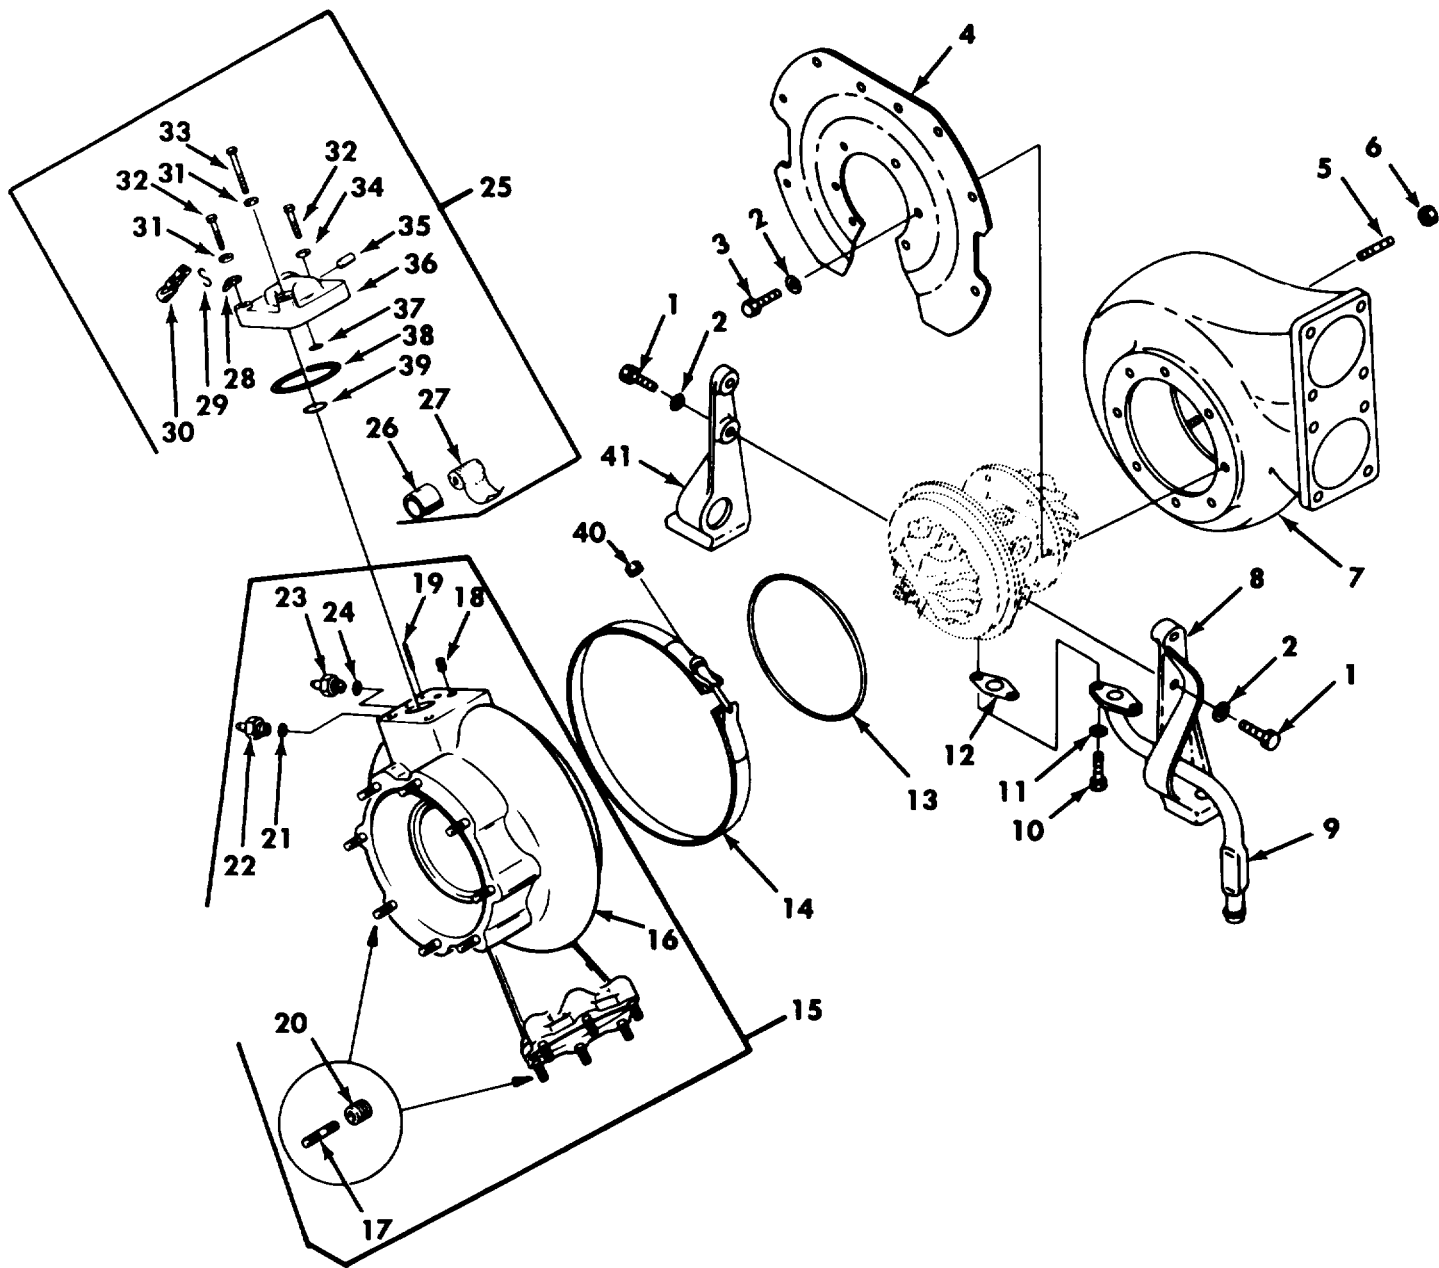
Compressor housing, turbine housing, and associated parts.
